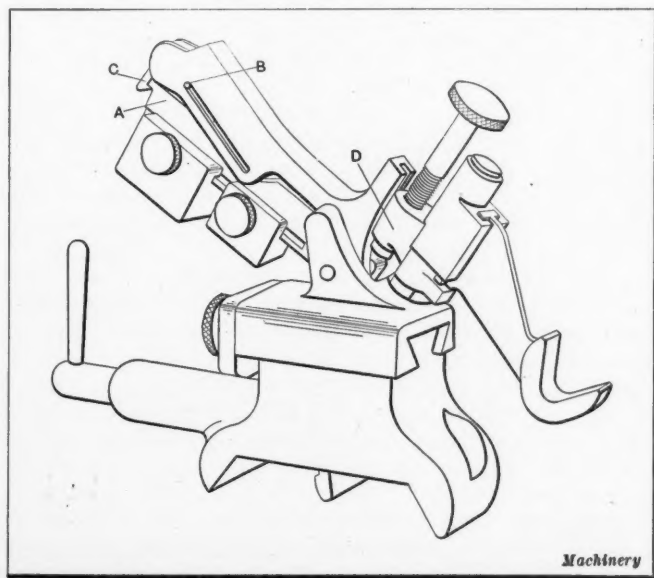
Adjustable Type of Steadyrest working on the Wedge Principle and adapted to Pratt & Whitney Plain and Universal Grinding Machines
